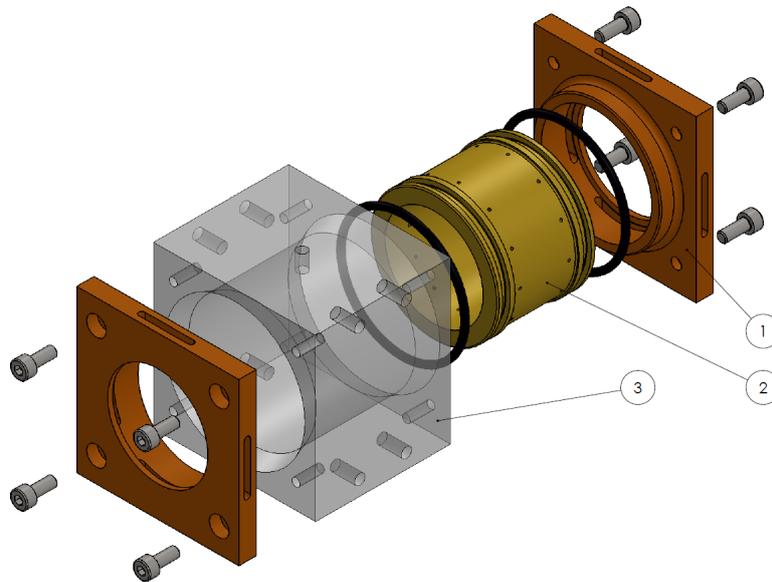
Exploded view drawing of the linear air bearing: (1) cover with jet deflectors, (2) bearing bush and (3) housing.
